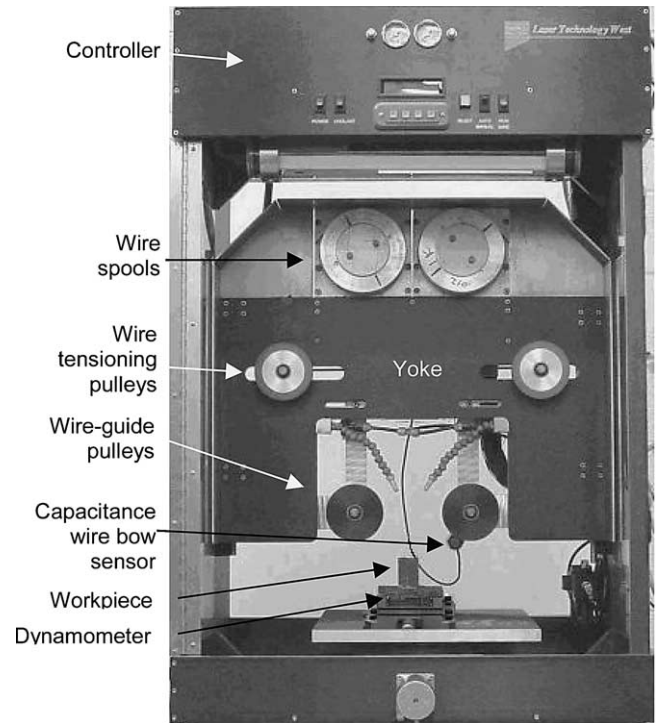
The spool-to-spool diamond wire saw machine used in this study.
